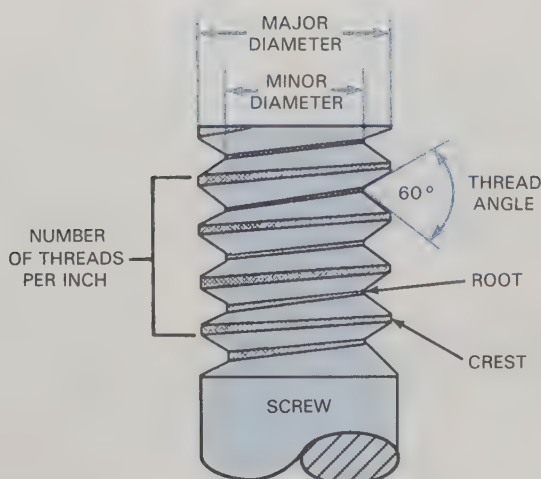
Parts of the screw thread. The number of threads per inch determines whether a thread is Coarse or Fine.
